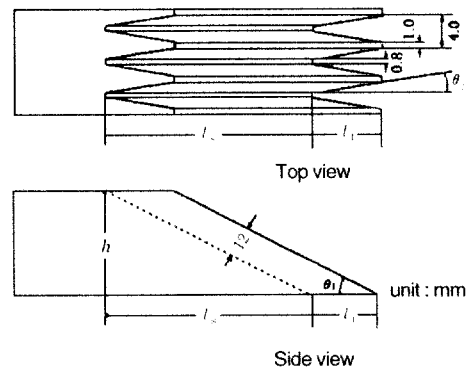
Type of specimen with a sloped finger-joint test-piece.
